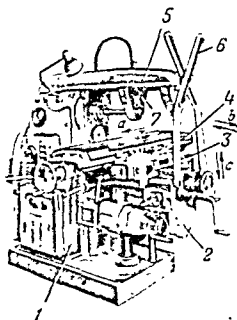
Plain horizontal knee-type milling machine, model 6M83Г
